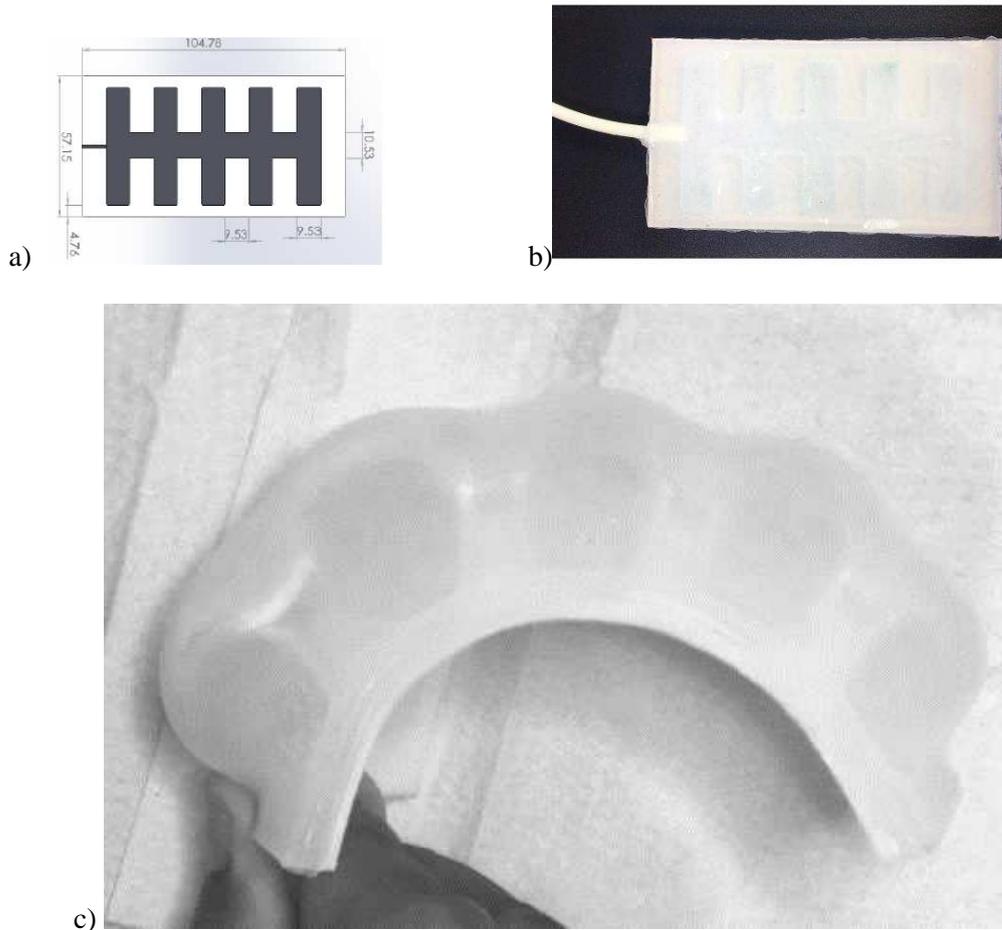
Casted Prototype: a) geometry (dimensions in mm), b) plan view of the realized prototype, c) Final deflected shape during inflation.
